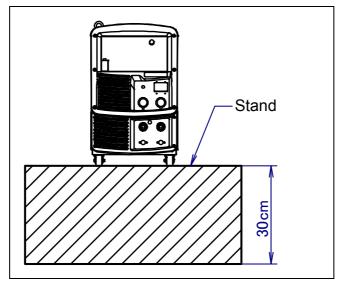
(f) Quantity advance of welding power supply.
